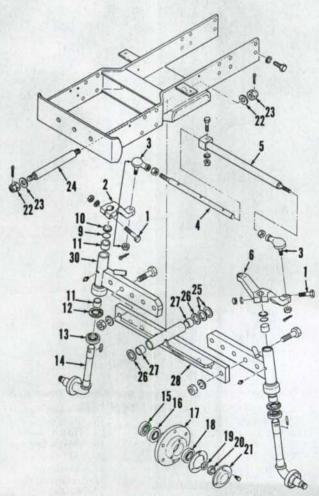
Exploded view of adjustable tread width front axle assembly used on Models 1120 and 1220 equipped with mechanical steering. Refer to Fig. 1 for legend except for the following:
